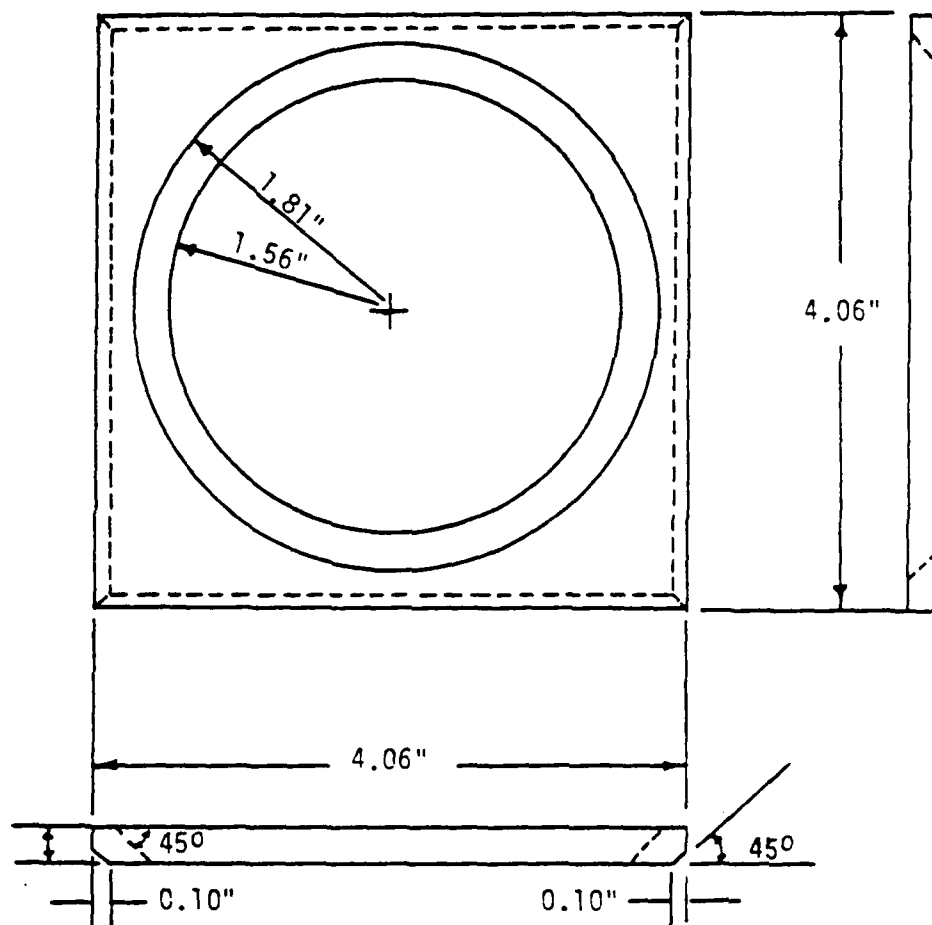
Leather Pad Dimensions (1.0 in. = 2.54 cm).
